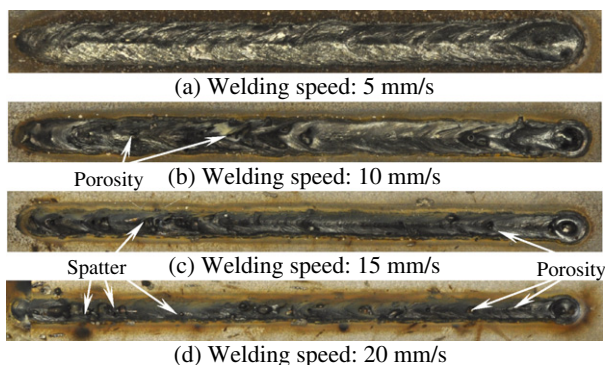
Top view of the welds under different welding speeds (Laser power: 2.0 kW).
